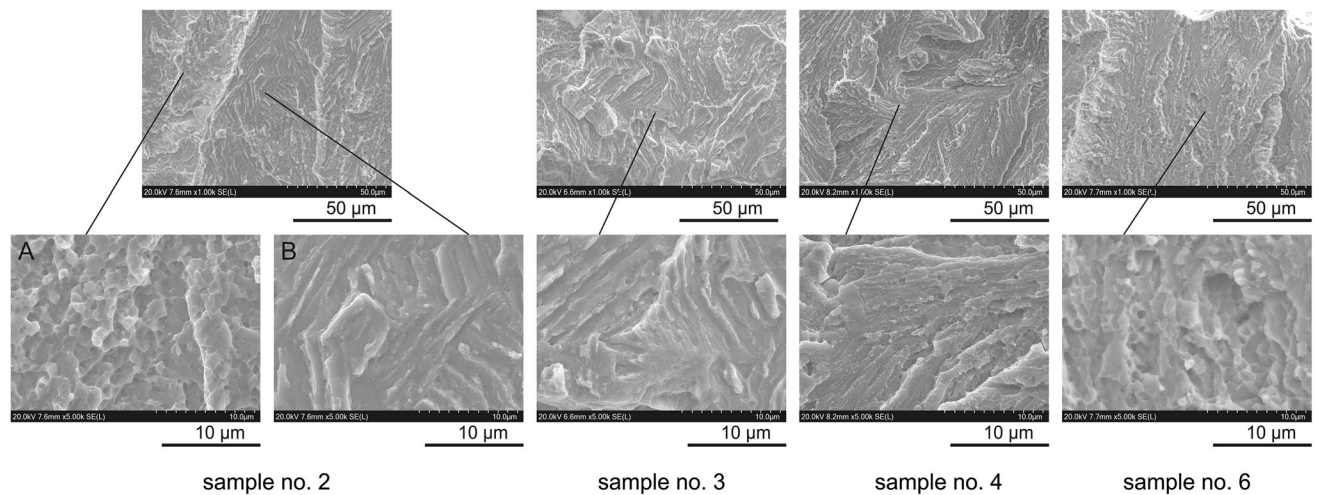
Fracture surfaces of OW samples no. 2 and 3, and LW samples no. 4 and 6.
